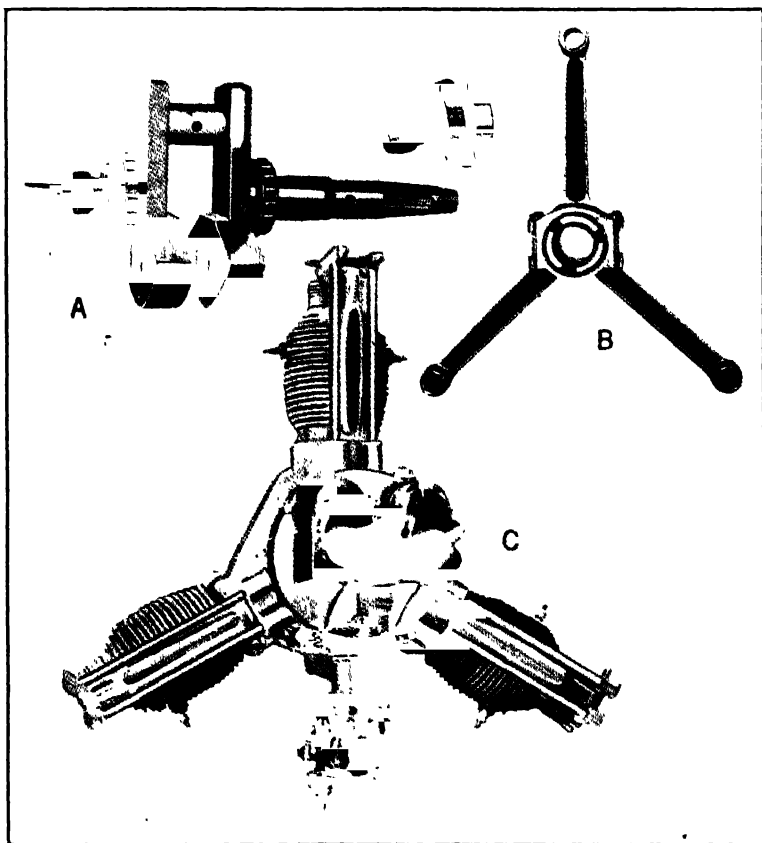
A.—Crankshaft Assembly of Szekely Engine. B—Connecting Rod Assembly. C—Rear View Showing Magneto Installation.
